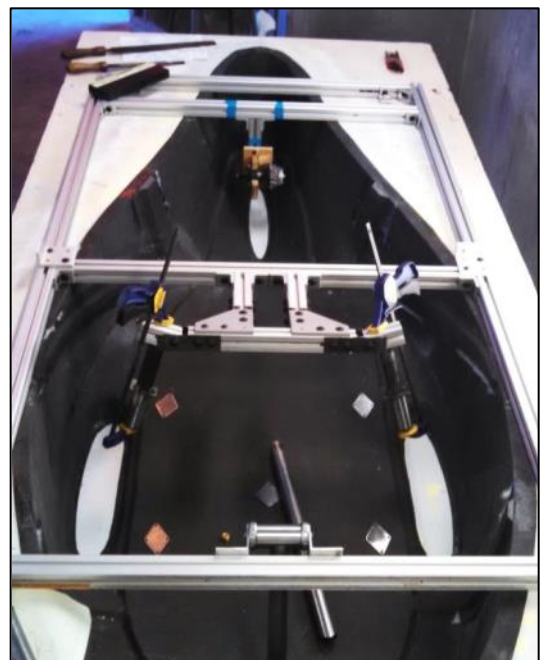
Alignment jig secured to bottom fairing mold, with all four hard points in place.
